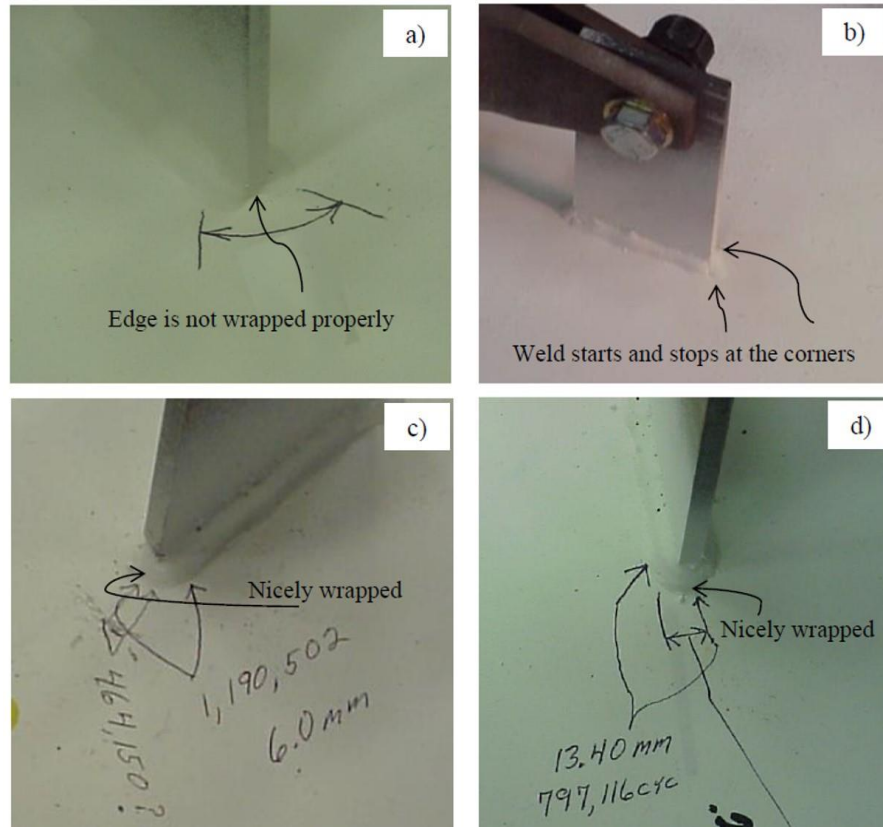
Variation in welded test samples: a) Missing weld deposit around the gusset edge (Sample # RE3), b) Weld starts and stops at the corners of the gusset edge (Sample #15), c) Nicely wrapped weld around the gusset edge (Sample #16), d) Another nicely wrapped weld (Sample #18) [65]
